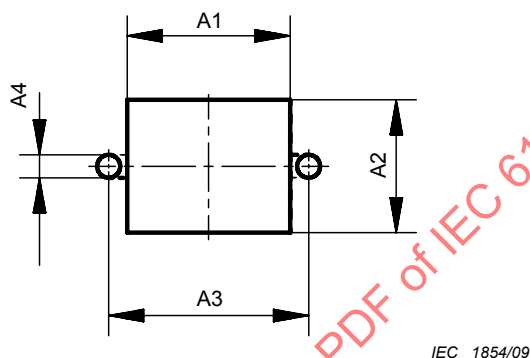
Panel cut out information; mounting hole Ø 2,3, or groove for M2
